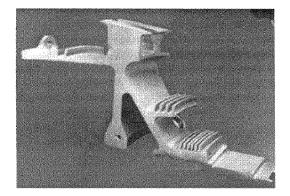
Example of seal teeth repair using the Dabber™ technique (Courtesy of Liburdi Engineering, Hamilton, Ontario).
